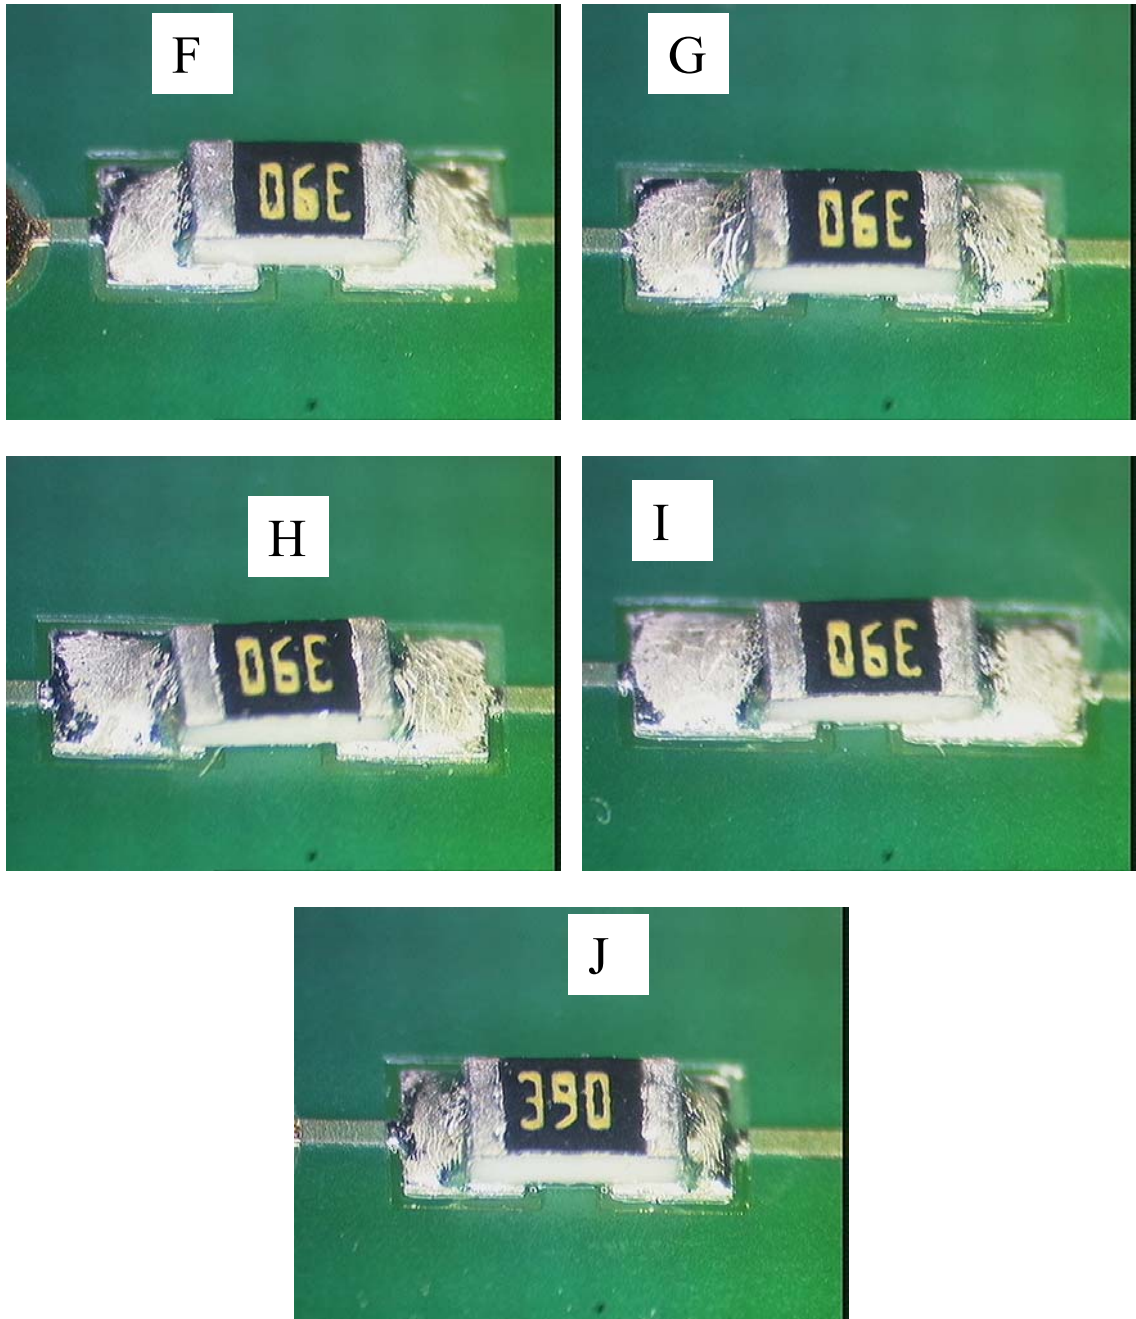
Images of soldered 0603-type resistors with 5 different pad designs
